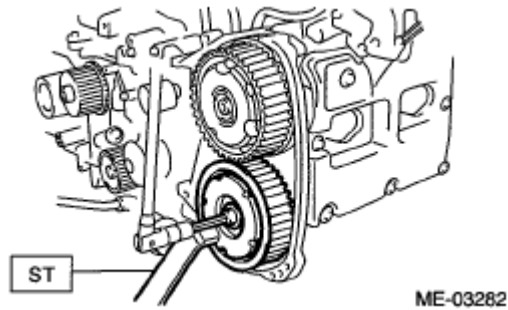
Removing/Installing Cam Sprocket Bolt Using Cam Sprocket Wrench
